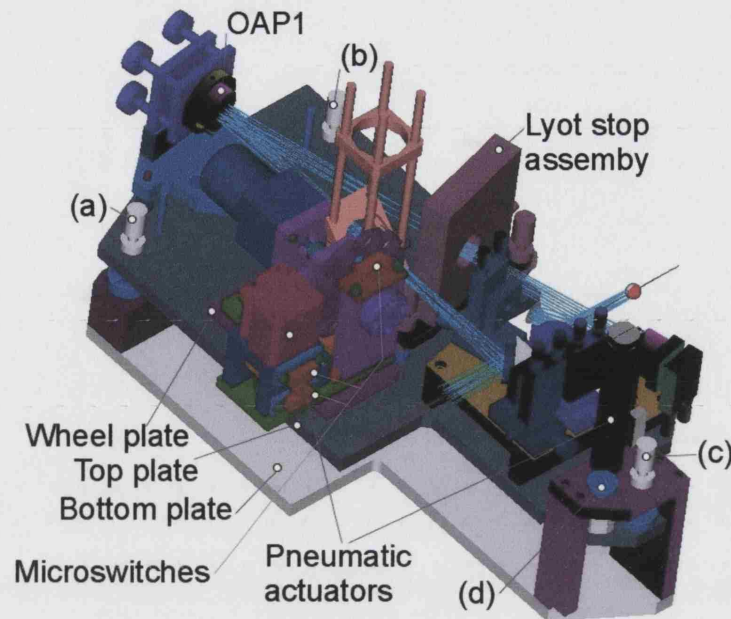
3-d CAD construction of the OSCA system (Andy Charalambous). Adjustable, ball-bearing tipped locking screws - (a), (b) and (c) provide precise height positioning of top plate and additionally (a) and (b) rest on groove and cone pads (light blue disk under (a)) to provide the pivot point for the deployment mechanism. Screw (d) provides a manual mechanism to lock the top plate up if needed (e.g. air supply failure).
